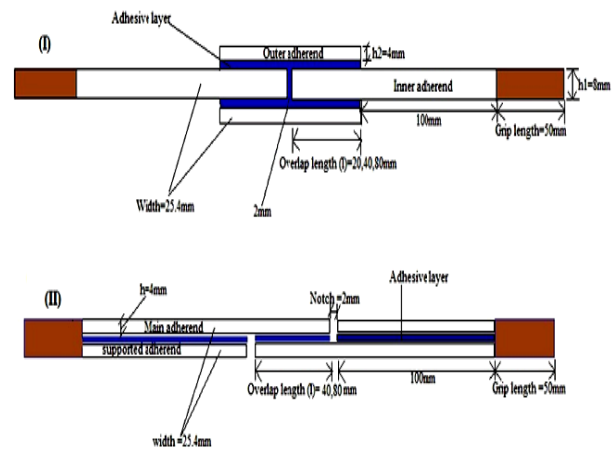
Specimen details and pictorial representation of (I) double strap GFRP joint specimen (II) supported single lap GFRP joint specimen.
